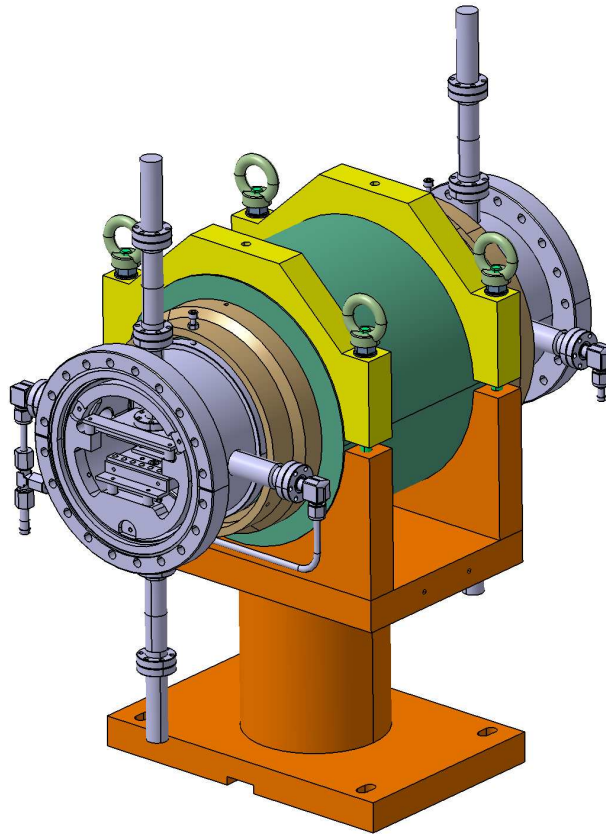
Complete chopper with vacuum tank mounted in a quadrupole on a beam line support [61]
